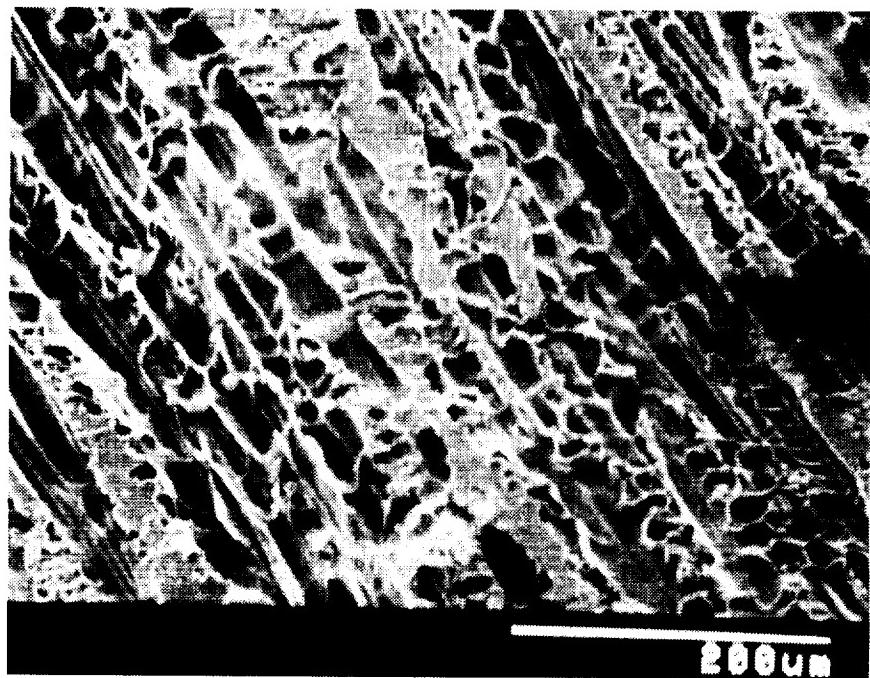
Surface Fracture of 7 second Weld at 1.75kW, 120kHz and 0.689Mpa.
